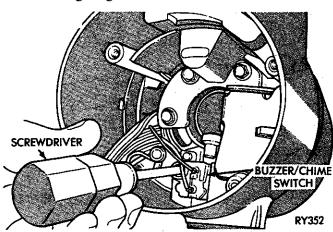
Ignition Key Buzzer/Chime Switch Removal
